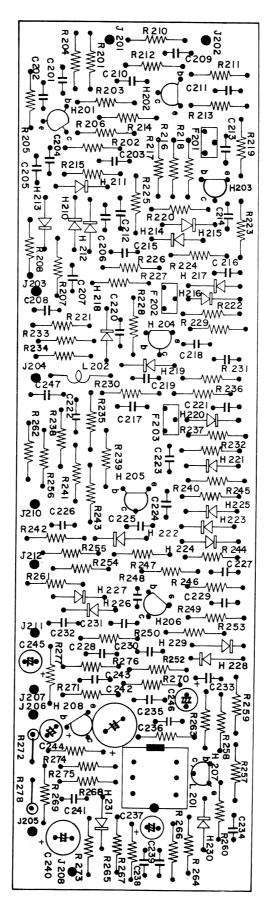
FM IF Amplifier Assembly P200 Component Locations
